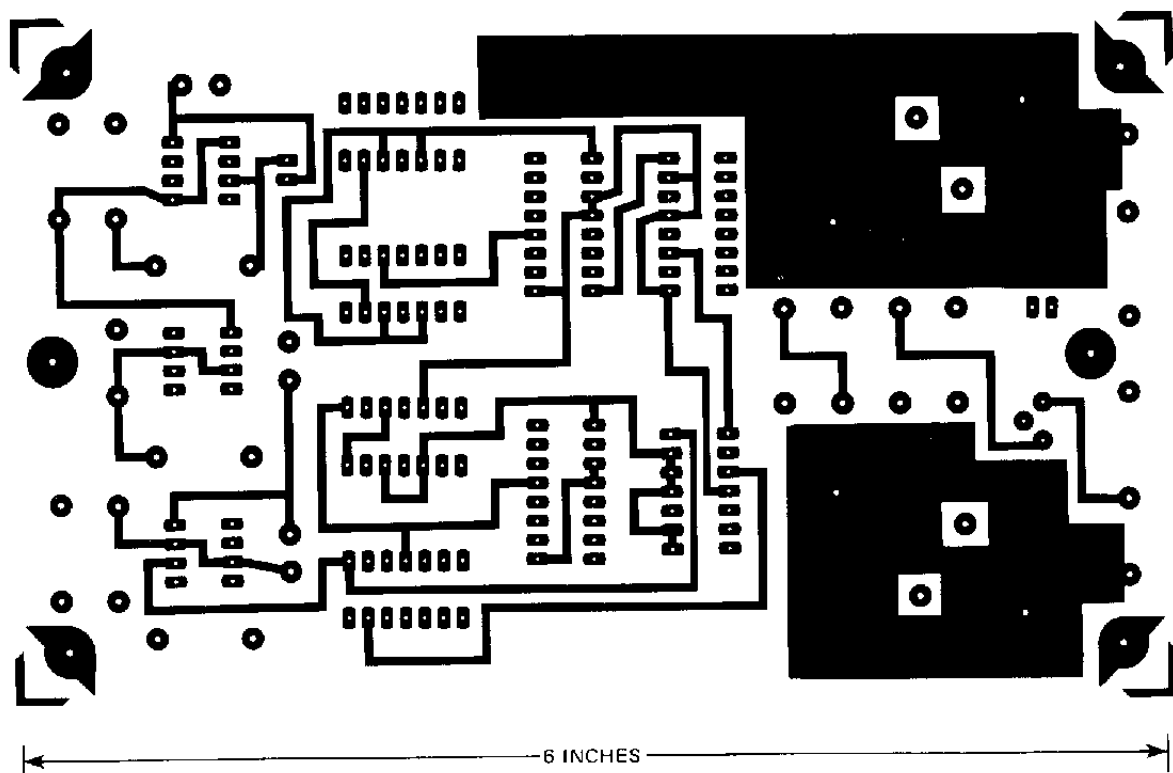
COMPONENT-SIDE foil pattern. Both sides of the board must be in perfect register. Holes should be plated-through.
